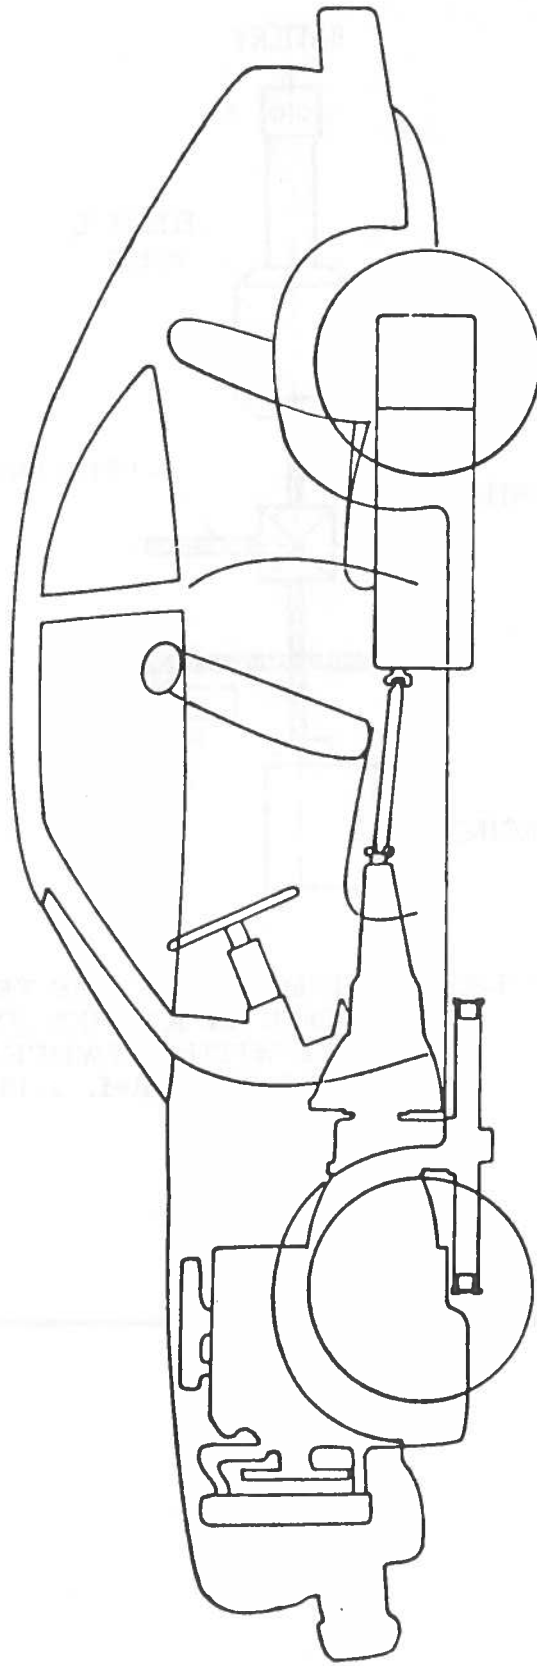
INSTALLATION SKETCH -- UNIVERSITY OF WISCONSIN
